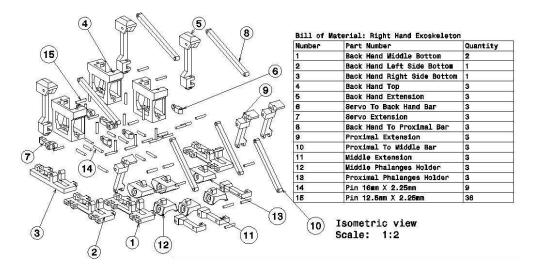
(c): Right hand exoskeleton in exploded view with bill of material.
